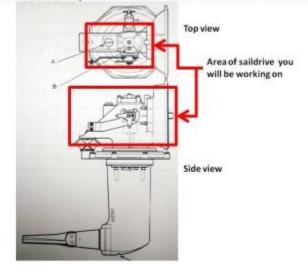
shows the side and top view of the saildrive and highlights the area of the saildrive you will be working on. Figure 2 is a close up of the area of the saildrive you will be working on. It also shows the bolts and nuts that you will be removing or loosening. The secret of not having to separate the engine from the saildrive and then moving the engine forward is that you will just be loosening the 4 nuts at the bell housing but not removing them from the stud bolt. You then push those stud bolts forward and it backs the pinion gear and its shaft away from the drive cone assembly and allows you to remove the drive cone assembly. You will also be removing the shift lever assembly before you remove the drive cone assembly.
